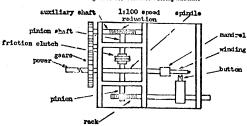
, Solenoid Winding Machine with Friction Clutch,
